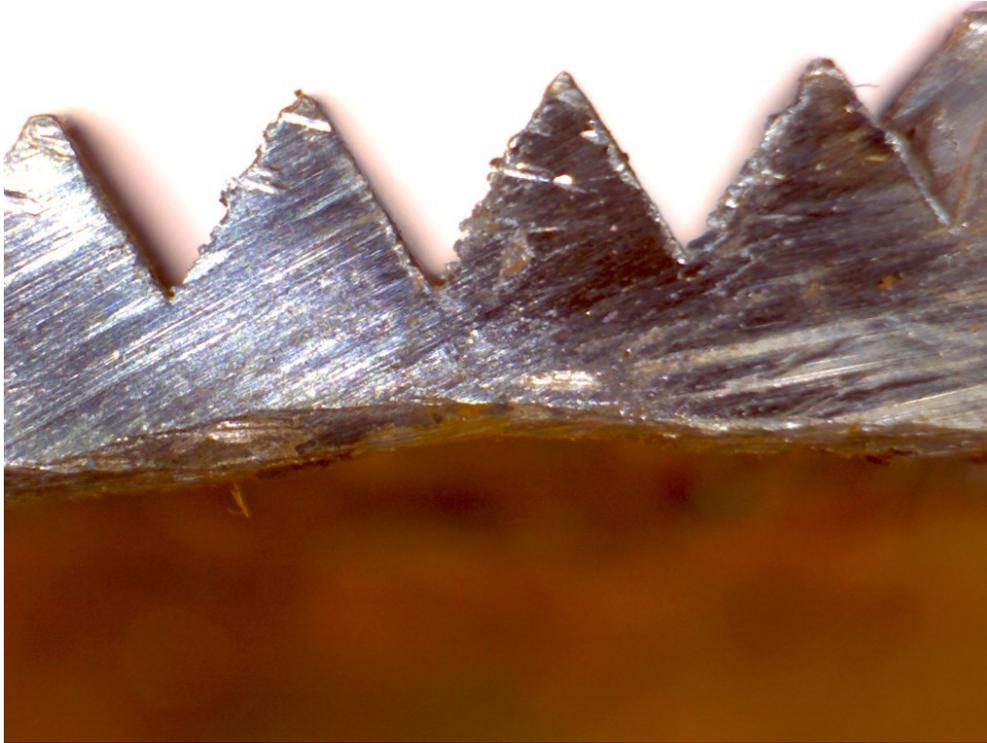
and Figure 6c: Threaded section demonstrating active corrosion near thread root. Less than 1 mm of material remains.
